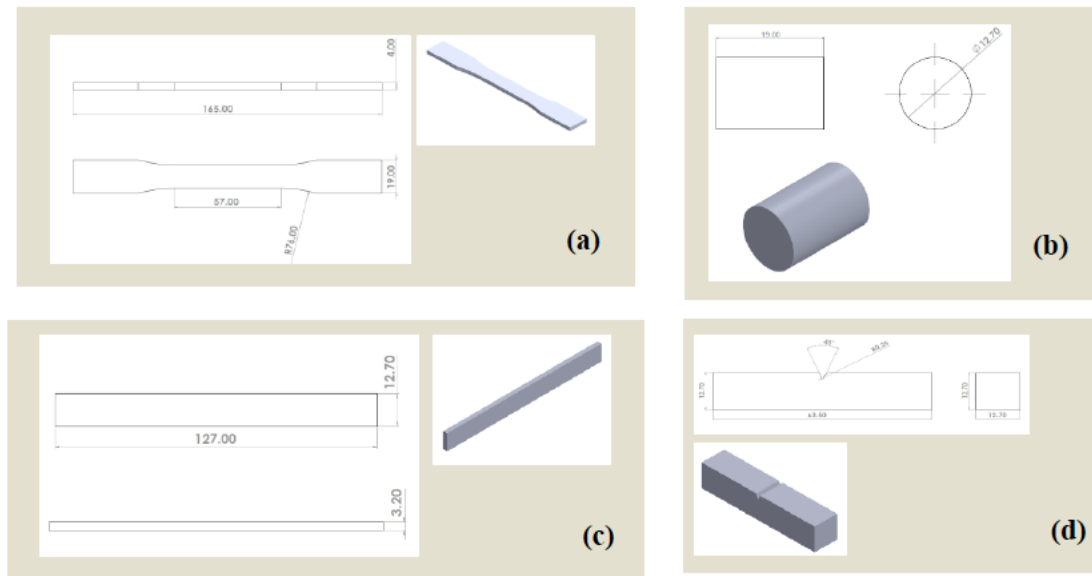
CAD models for the specimens: (a) Tensile test according to ASTM (D638-22), (b) Compression test following ASTM (D695-23), (c) Flexural test as per ASTM (D790), and (d) Impact test in accordance with ASTM (D256-23).
